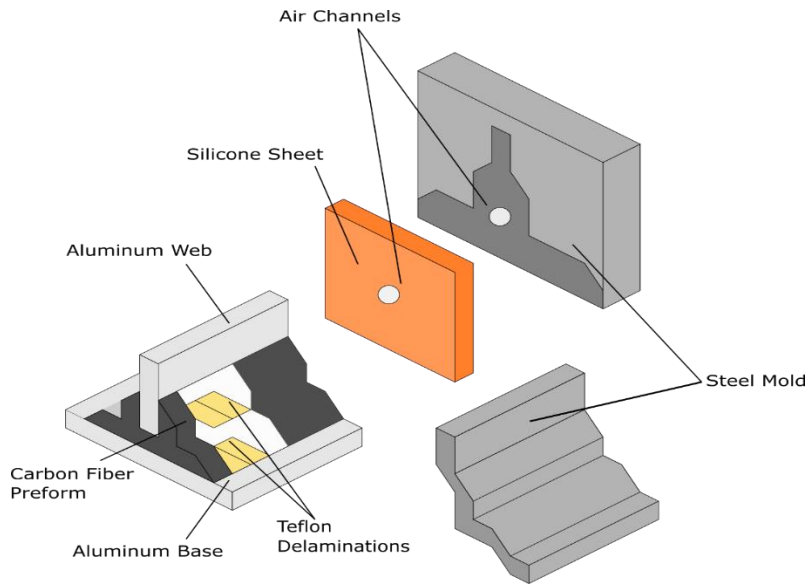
Assembly of parts in manufacturing Pi-joints
